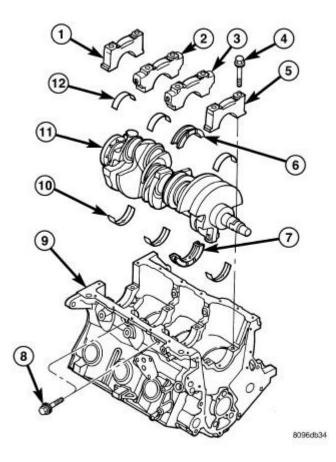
Identifying Crankshaft & Main Bearings Courtesy of CHRYSLER LLC
